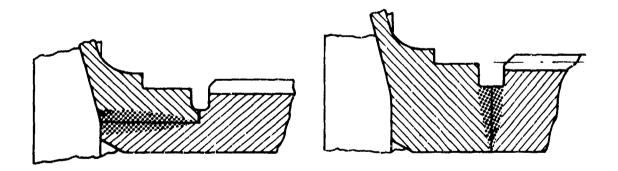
Weld Configurations, First-Row Pinion.
